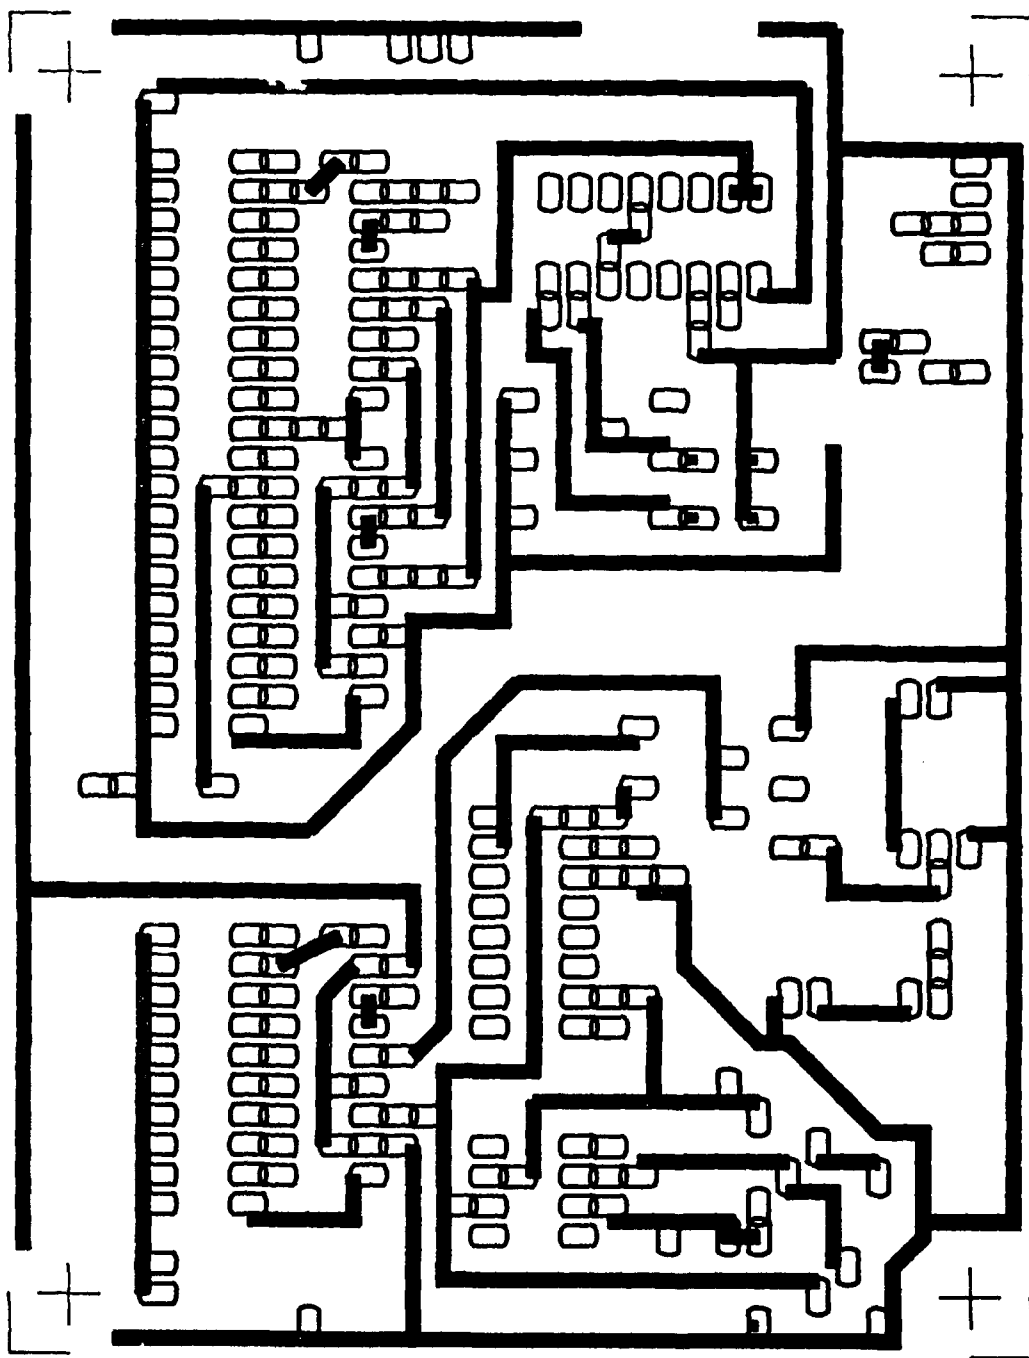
View of parts side of meter circuit board showing layout of components and jumpers. Jumpers designated by \* are routed on the trace side.
